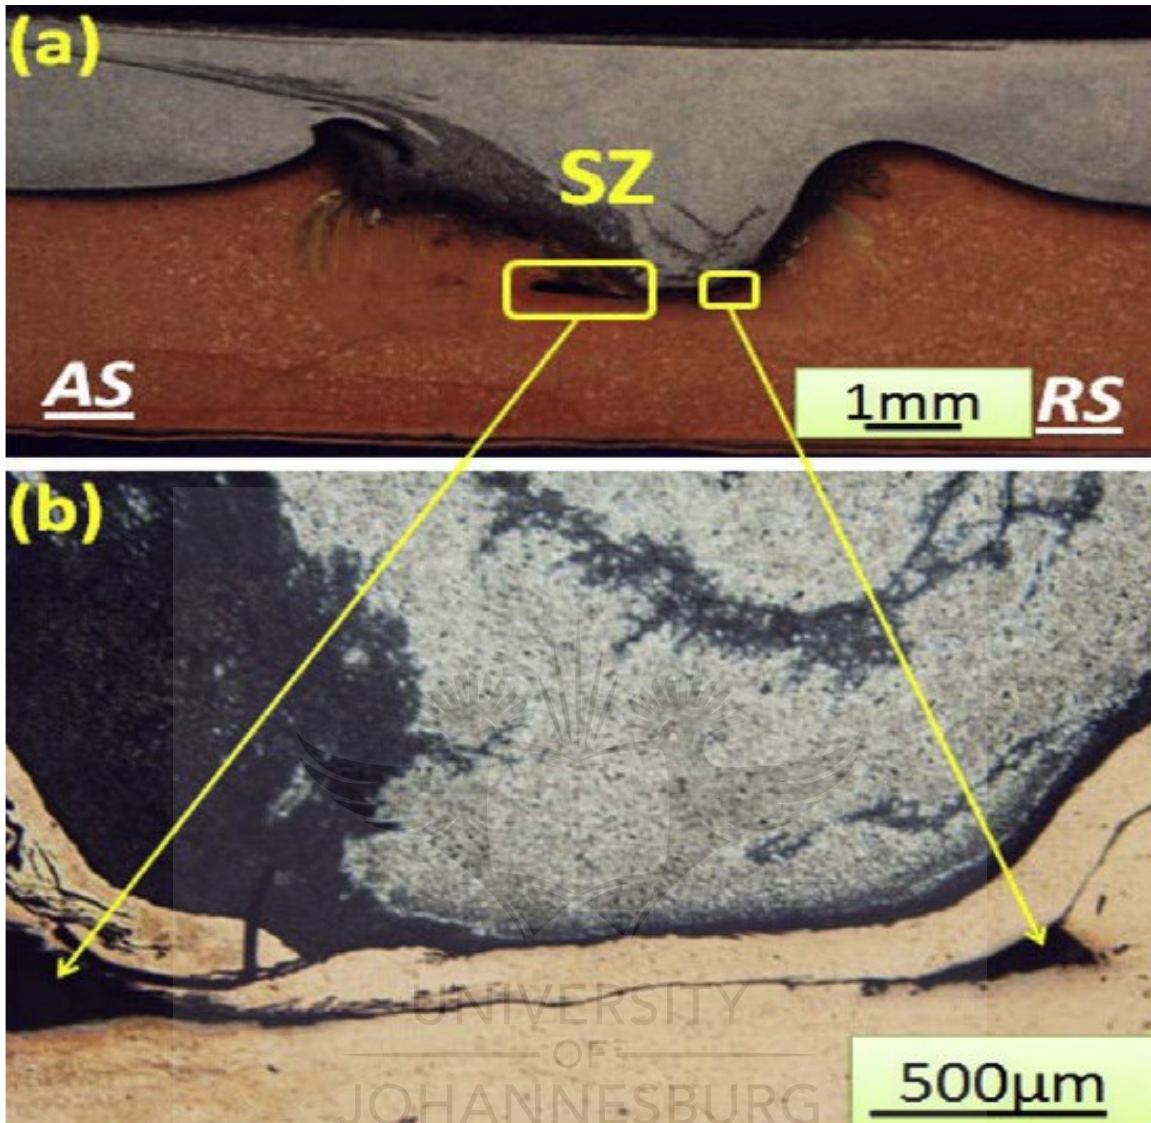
(a) Macrostructure; and (b) some channel defects on the sheet interfaces in the weld produced with 600 rpm and 32 mm/min [88]
